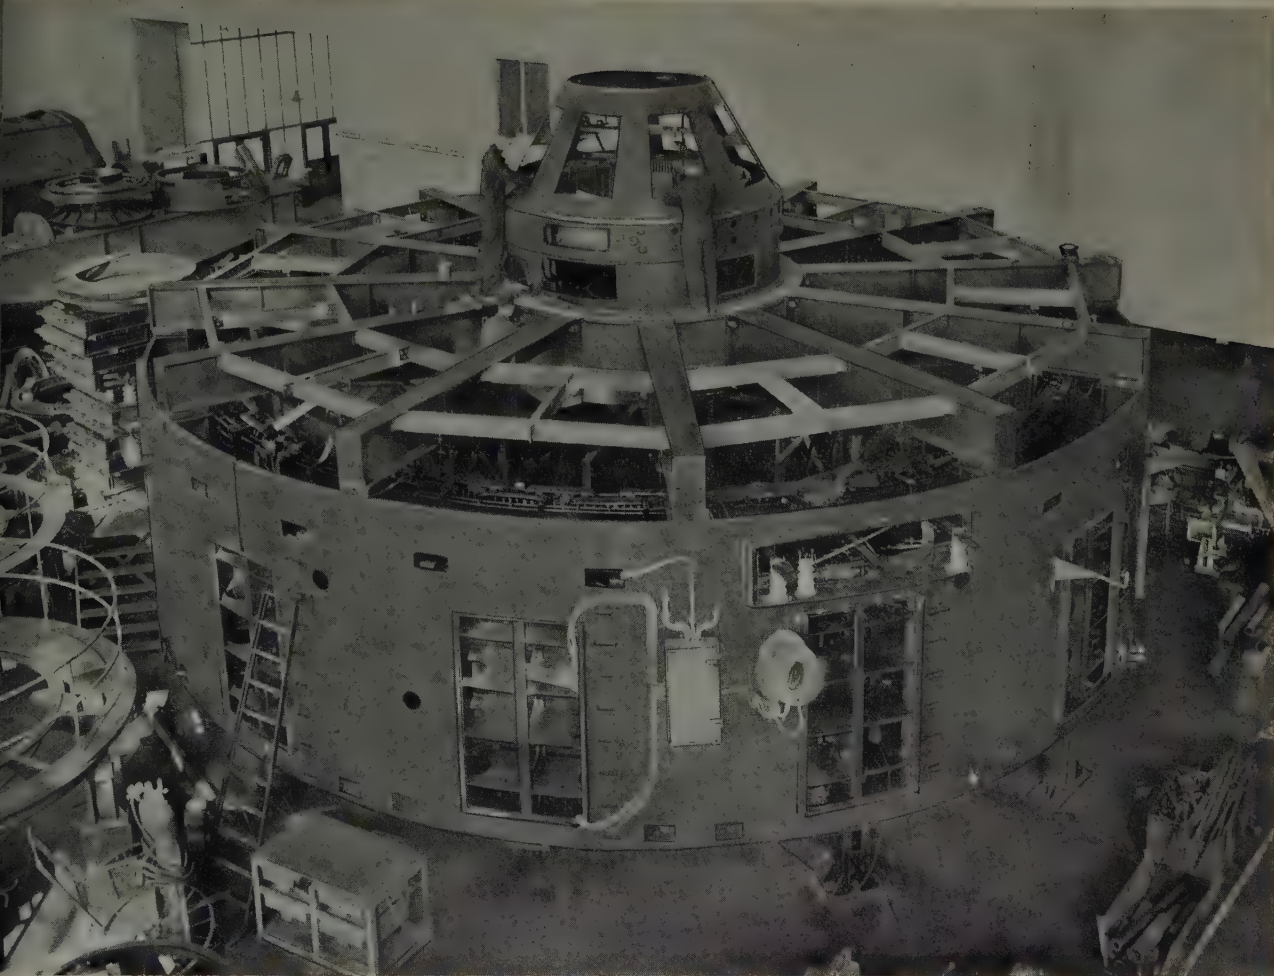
The stator set up in the workshop for the fitting of the upper bearing bracket, exciter, etc. The new light design of the upper bearing bracket ensures a minimum of machining. (50945)
